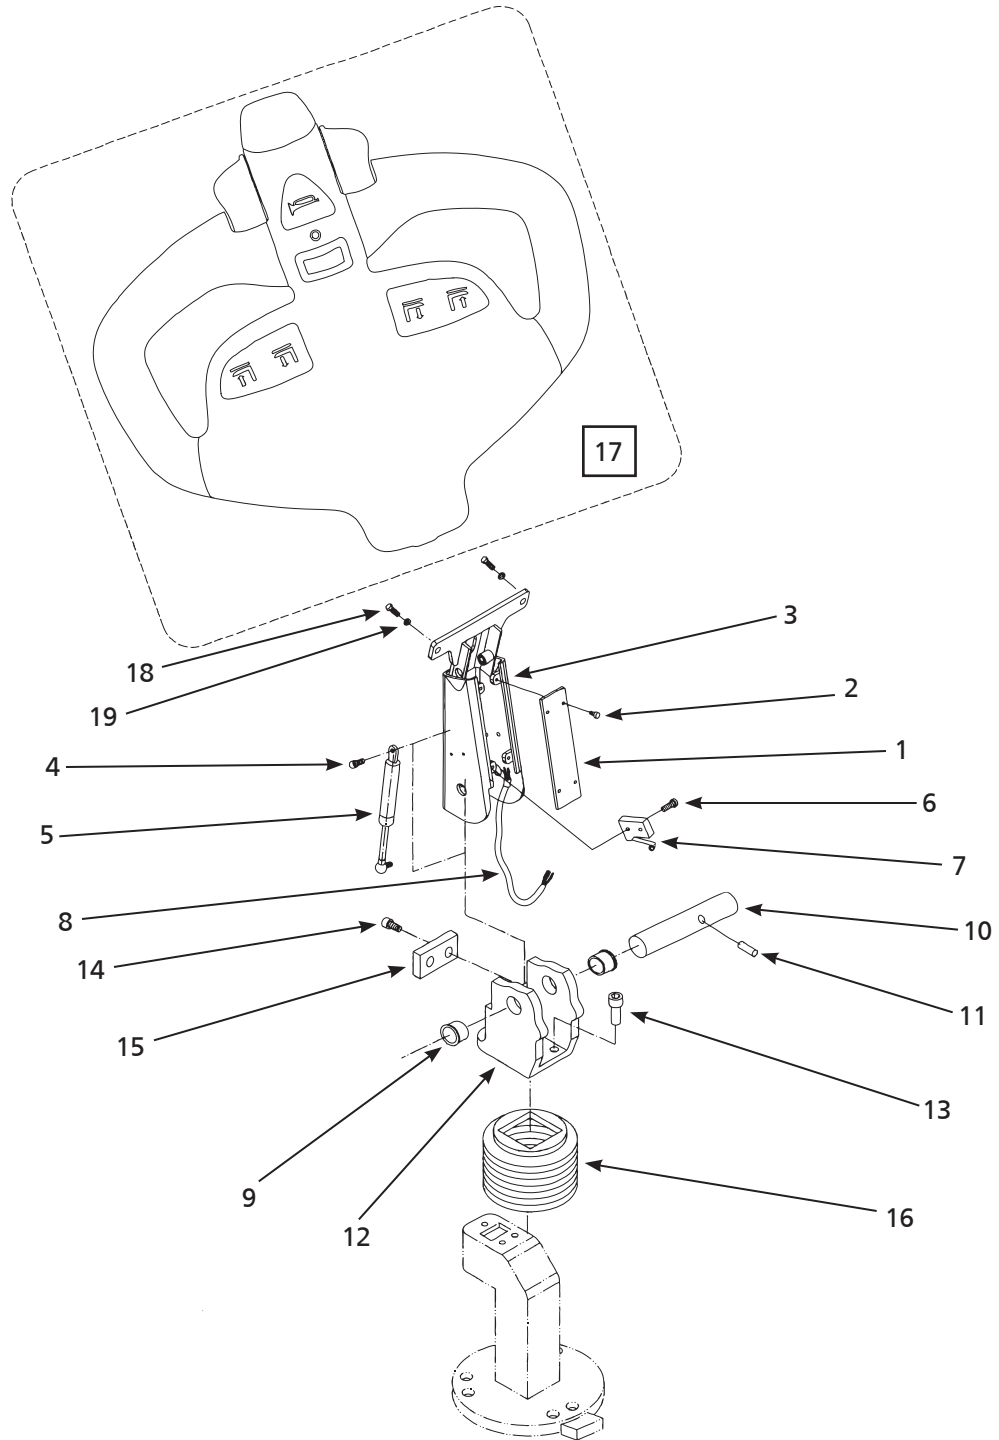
Repair Parts Illustration for Pallet Truck Handle Assembly (Model 2LEB9A)
